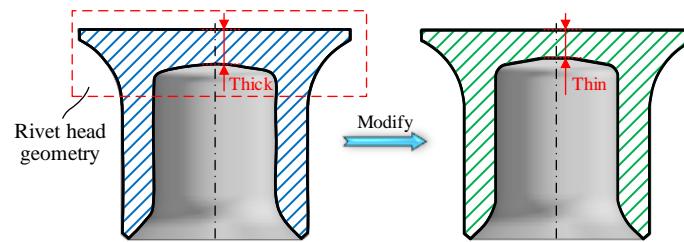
Modification of the rivet head geometry to reduce the maximum riveting force
